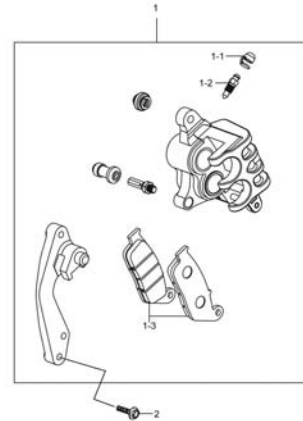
FRONT BRAKE CYLINDER (P12-S430-0005)
